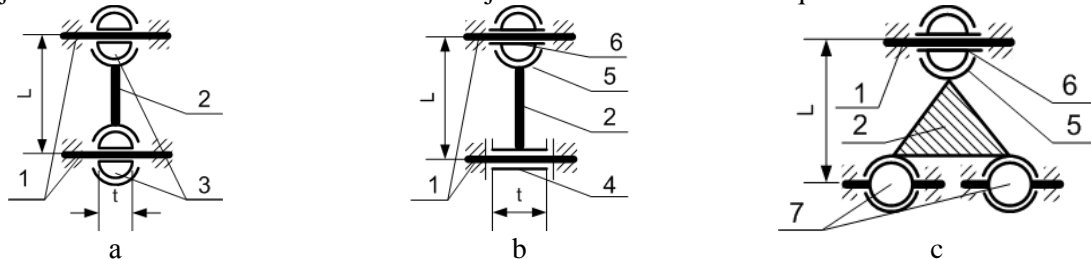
Kinematical schemes of CTM suspension: a - initial; b – with a cylindrical joint; c – three-joint; 1 – rollers; 2 – link; 3 – moving spherical joints; 4 – cylindrical joint; 5 – spherical pair; 6 – cylindrical guideway; 7 – nonmovable spherical joints.
